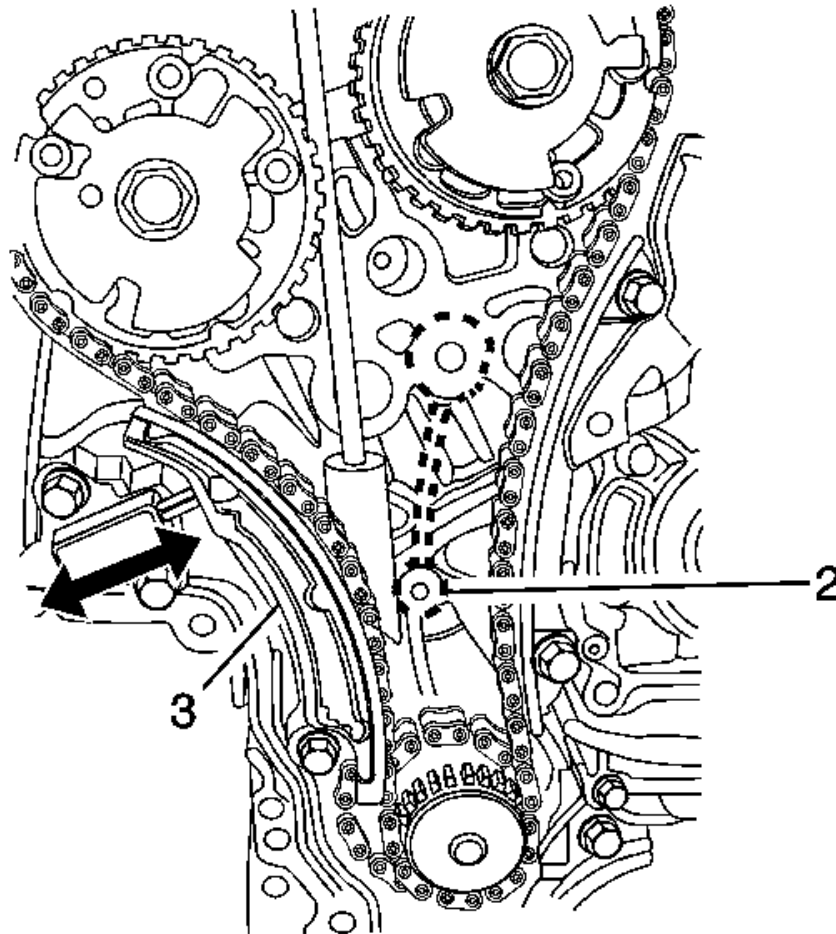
Opening Gap Between Chain & Internal Rib In Front Cover
